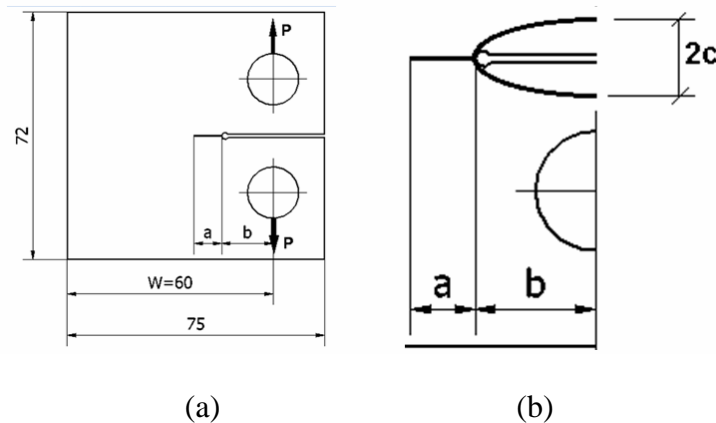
a) Modified C(T) specimens, dimensions in mm.
